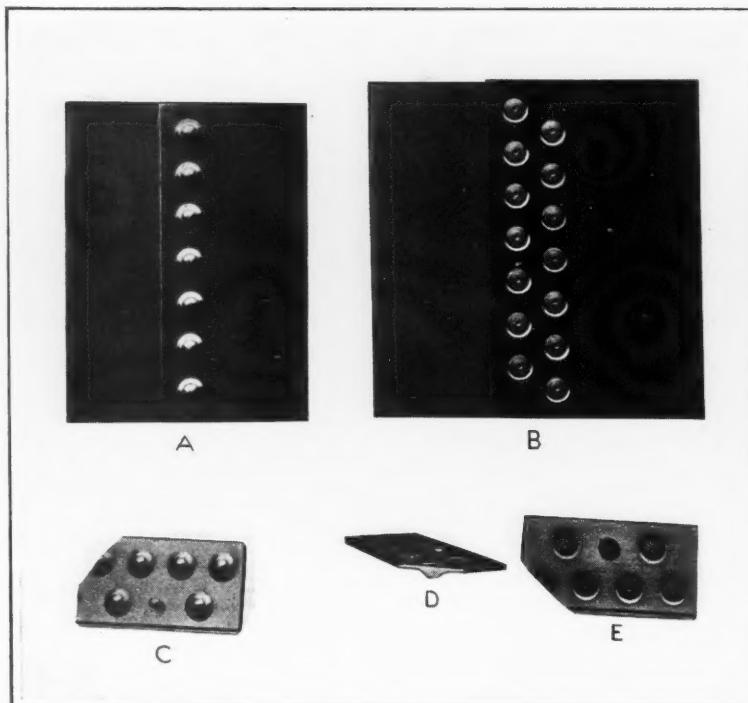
Examples of Sheet Metal Joints Made by Countersunk Riveting Process which Leaves Joint Flat on One Side
